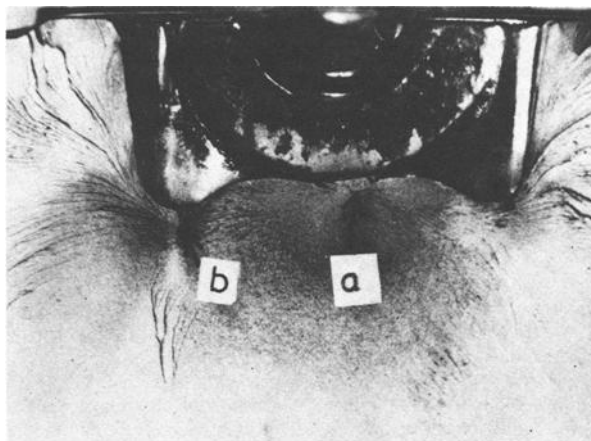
The macroscopic fracture surface of a knuckle forging die for a motor vehicle, SKD62. Arrows a and b show crack initiation points.
